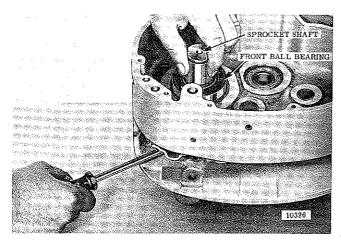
Removing Sprocket Shaft and Front Bearing
